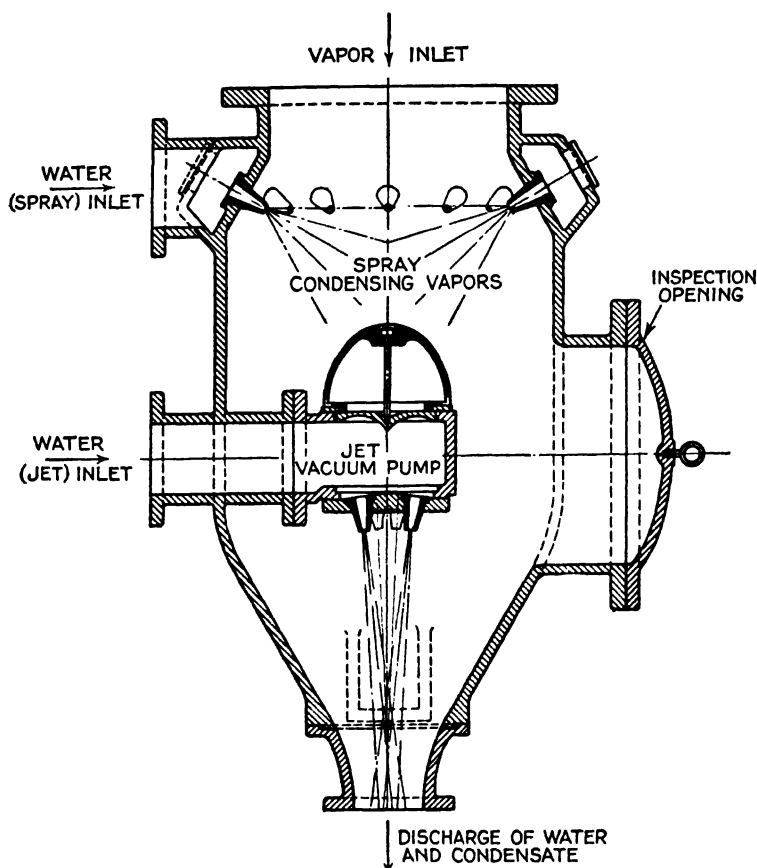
Barometric Condenser with Jet Vacuum Pump Courtesy
